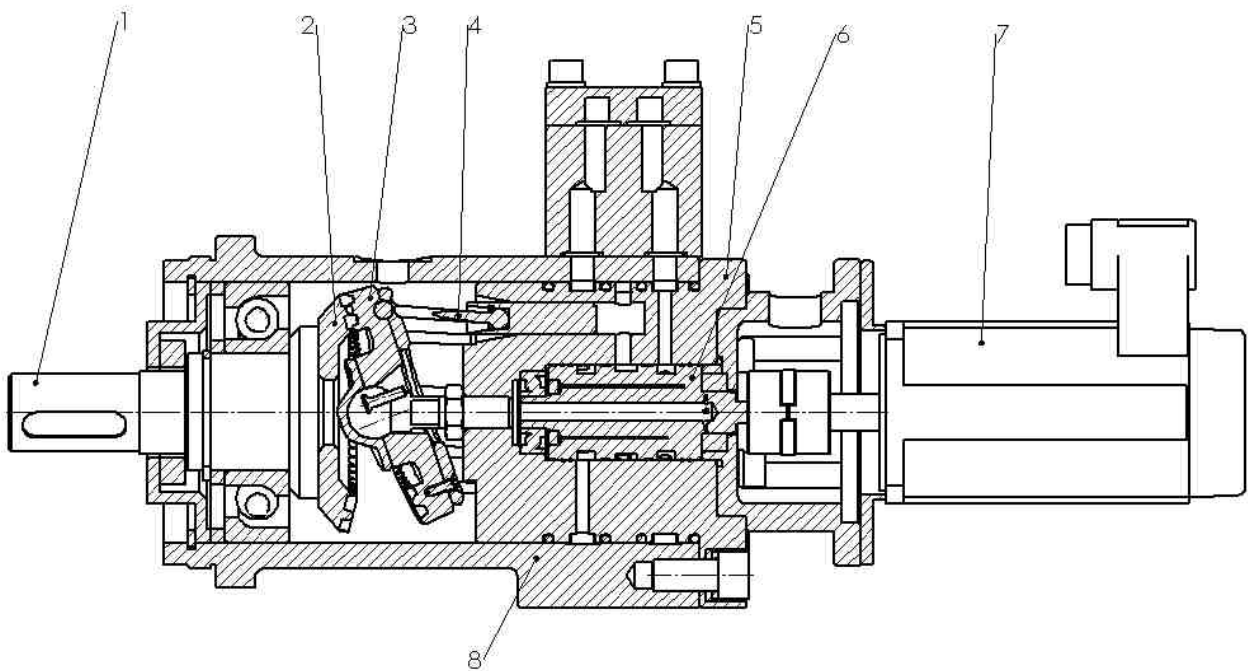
Slow hydraulic motor: 1 - output shaft, 2 - toothed wheel driven, 3 - driving sprocket (tilting disc), 4 - piston 5 - block port pistons, 6 - distributor, 7 - electric motor, 8 – housing
